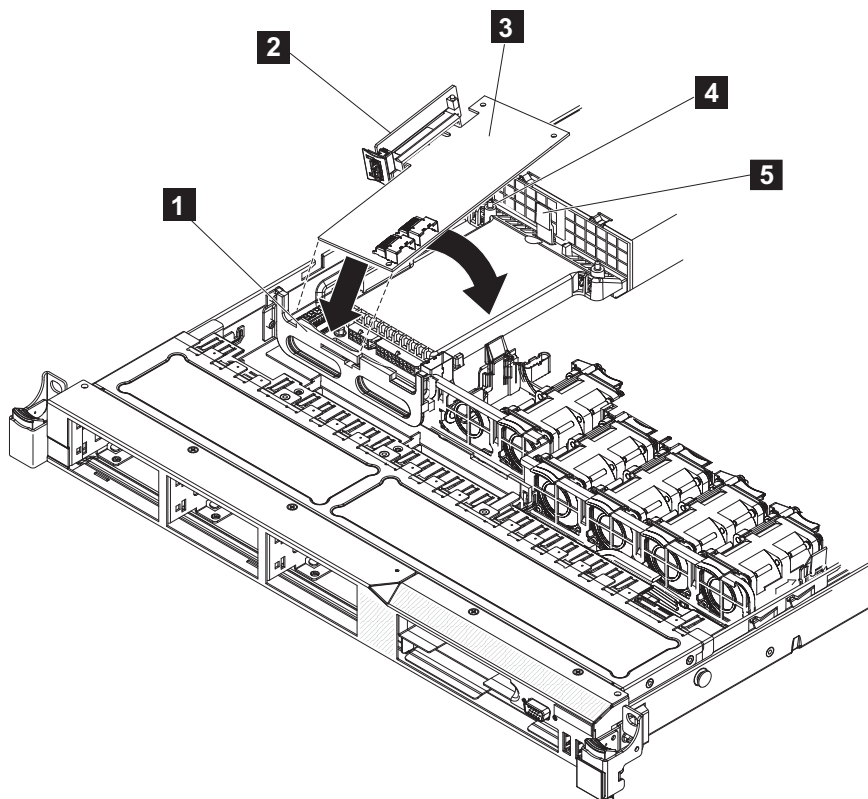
Engaging the disk-controller front-retention bracket and replacing the riser assembly and disk controller
